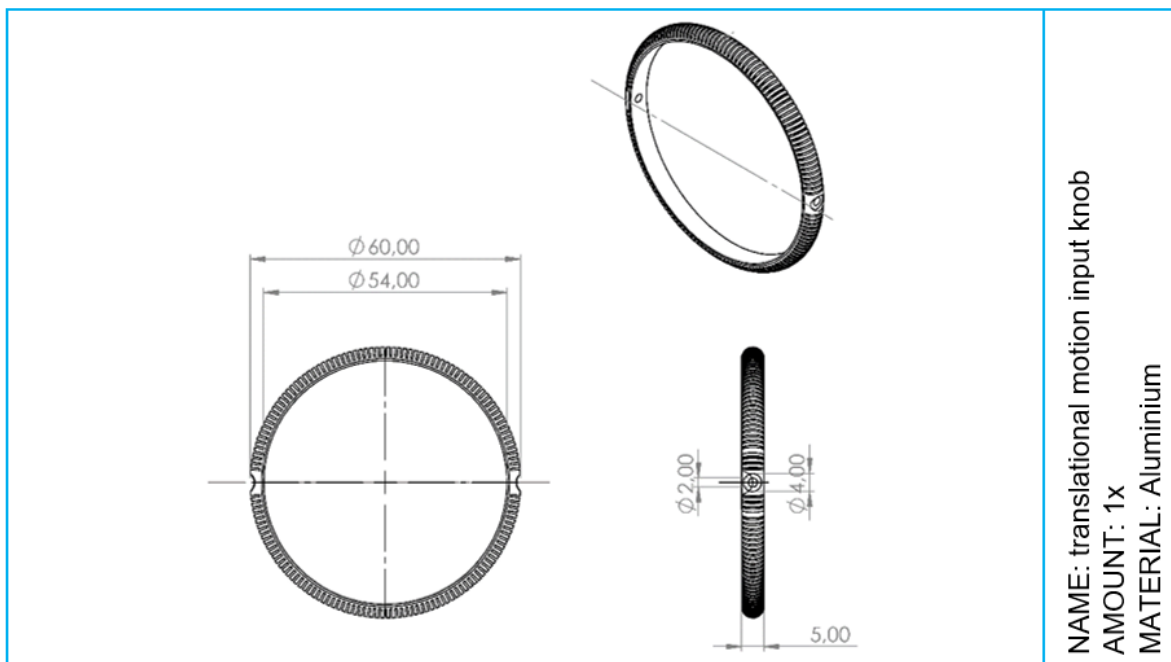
Construction drawings of the translational motion input knob - Machined prototype
